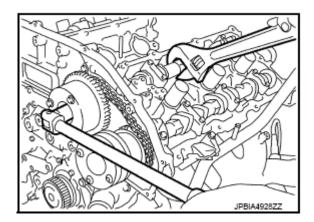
Removing Camshaft Sprocket (INT) Mounting Bolt Courtesy of NISSAN NORTH AMERICA, INC.
